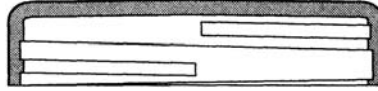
Type of plastic cap that is liable to prevent a seal: the upper end of the thread is stopped too low, and is liable to meet the top end of the thread before it is screwed home
